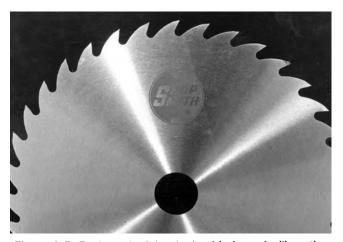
Each tooth of the ripping blade works like a tiny chisel to chip out its own bit of wood. Deep gullets collect and spew out the heavy waste. This blade should never be used for general-purpose sawing.
